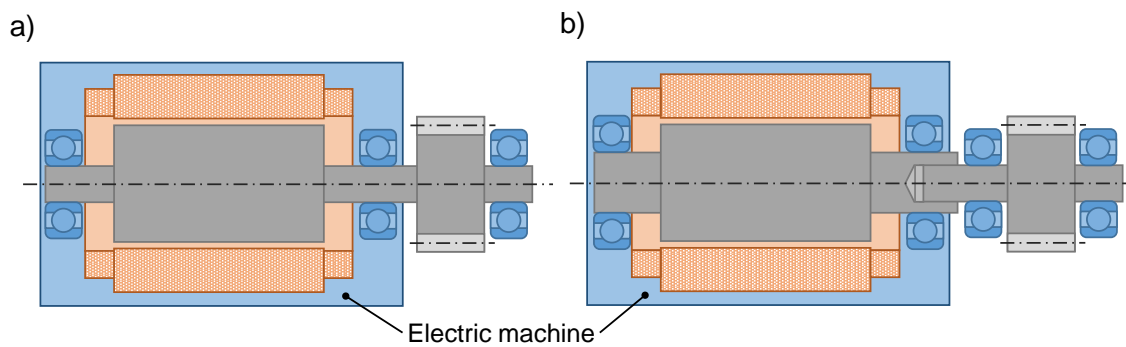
Schematic example designs of the gearbox input shaft; a) integral design, b) modular design
